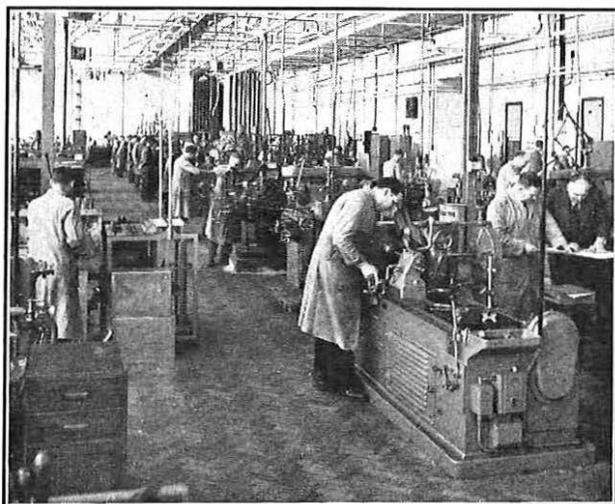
GENERAL VIEW OF MACHINE SHOP.
